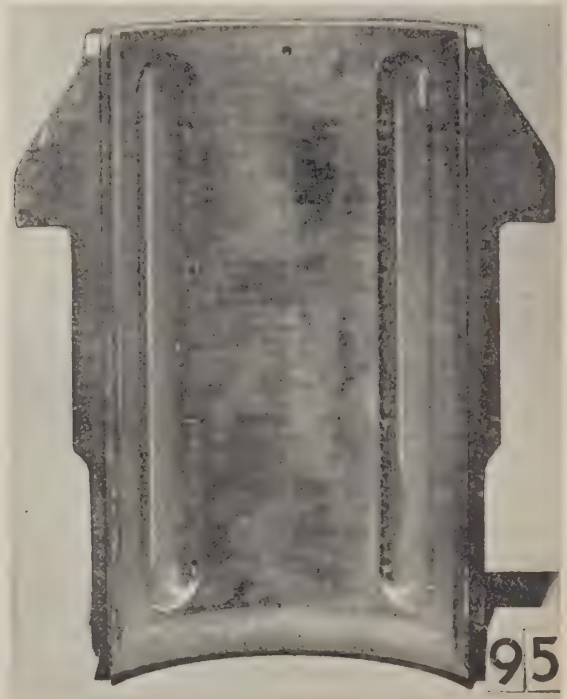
FITTED RAILWAY SERVICE AND SUPPLY CORPORATION "V" BEARING 95 AFTER TESTS
